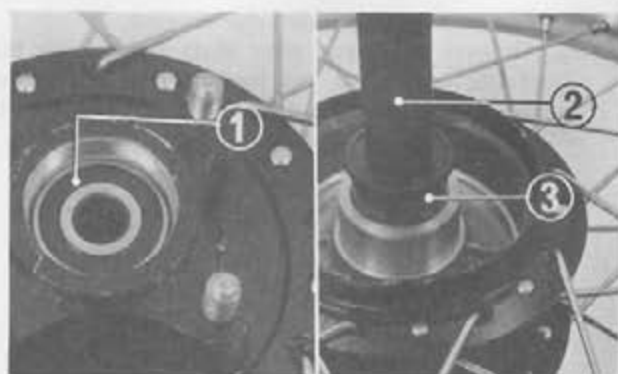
(1) Radial ball bearing (2) Bearing driver handle (3) Bearing driver attachment
